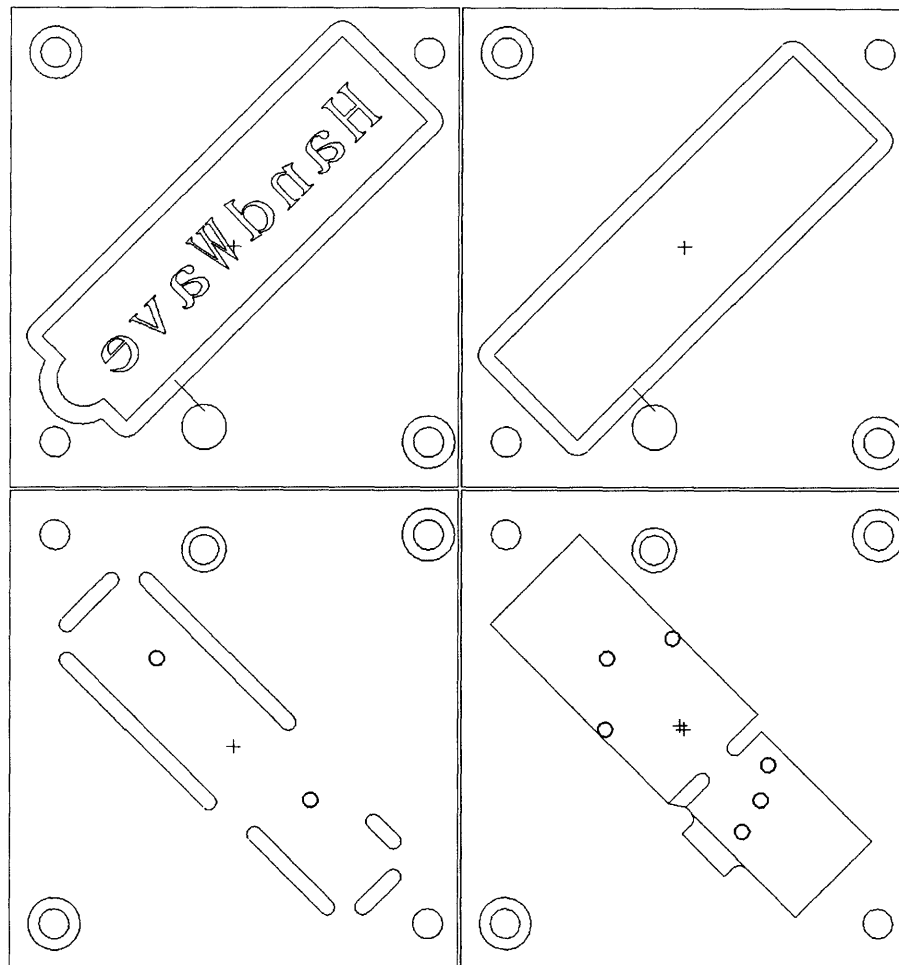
Dimensioned MasterCAM drawing of HandWave housing body
